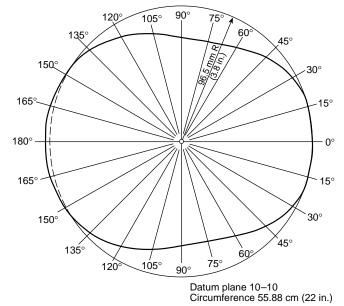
(b) ISEA size 7 headform, side with modification for steel terminal junction bolt.
